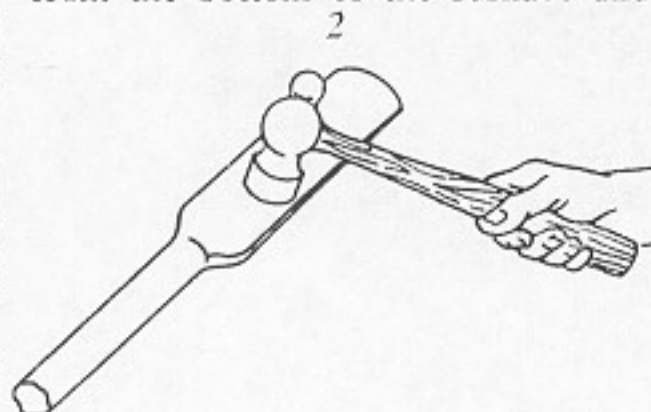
A piece of metal can be shaped by hammering if the material is malleable.
